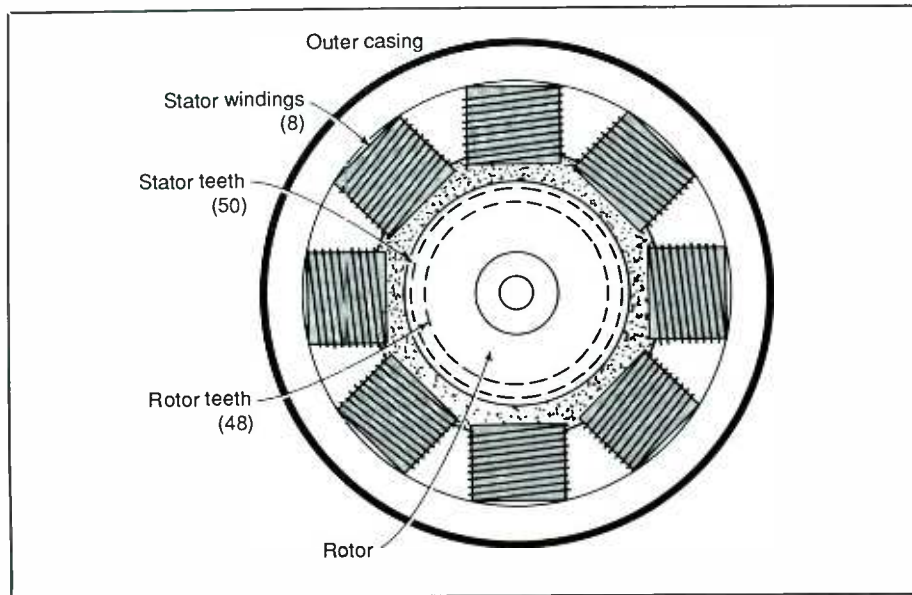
Cross-sectional view of a typical stepping motor shows phase windings and a 48/50-tooth pitch.
